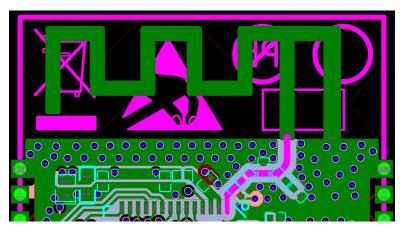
ESP32-S3 RF Layout in a Four-layer PCB Design
